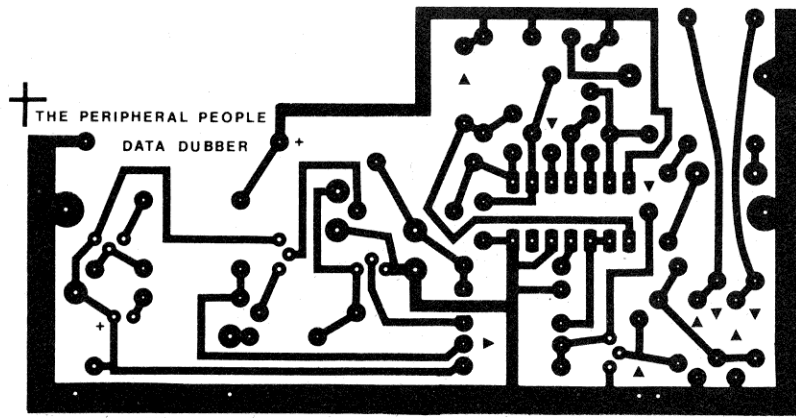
Artwork and component layout for the circuit board. Note—this drawing is actual size.
